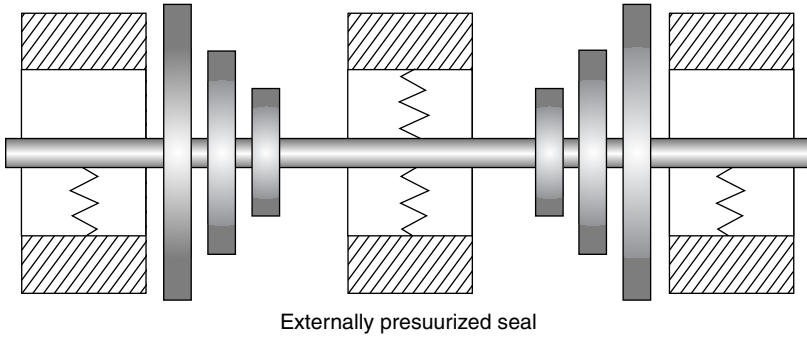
Side view of a rotor system with an additional spring at the midspan seal location.
